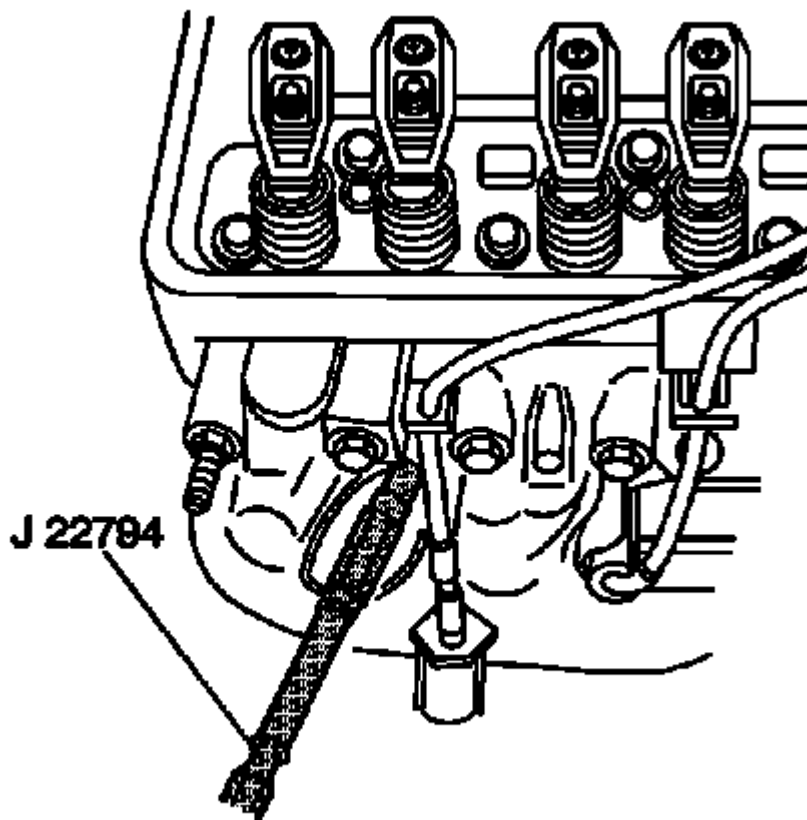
View Of Special Tool J 22794 Installed Into Spark Plug Hole
